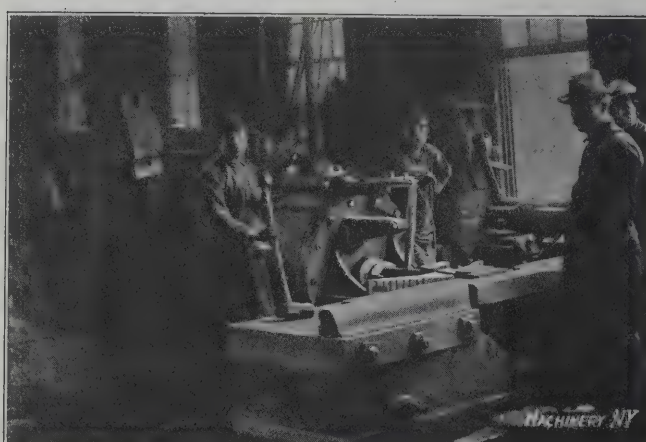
Compressing Spring Bands in a Steam Bulldozer
